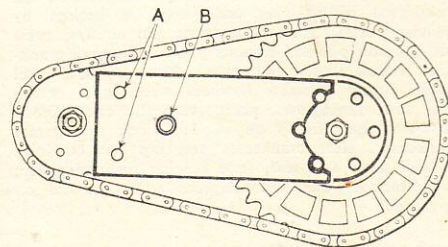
ALTERNATIVE LOCKING PLATE (3/8 in. thick), with two 1 in. by 1/2 in. studs brazed in plate at A. Plate drilled at B to fit over chaincase fixing-stud and engage in teeth of engine sprocket and spring pegs on clutch-centre, locking sprocket and clutch-centre to facilitate removing and securing of holding nuts.
